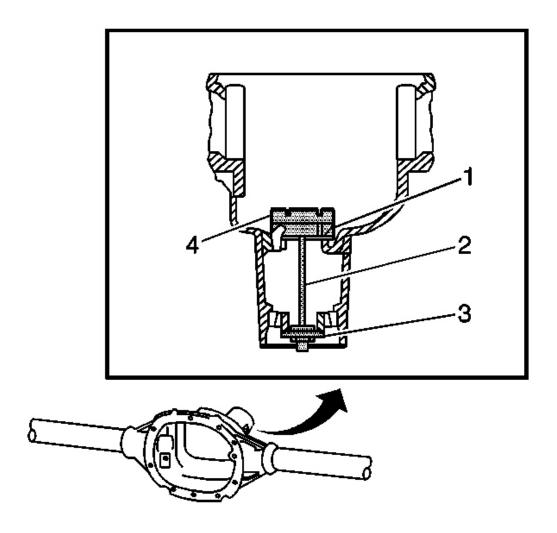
Assembling Special Tools In Axle Housing Courtesy of GENERAL MOTORS CORP.
